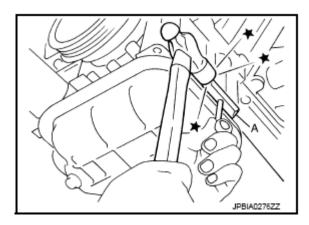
Sliding Seal Cutter By Tapping On Side Of Tool With A Hammer Courtesy of NISSAN NORTH AMERICA, INC.
